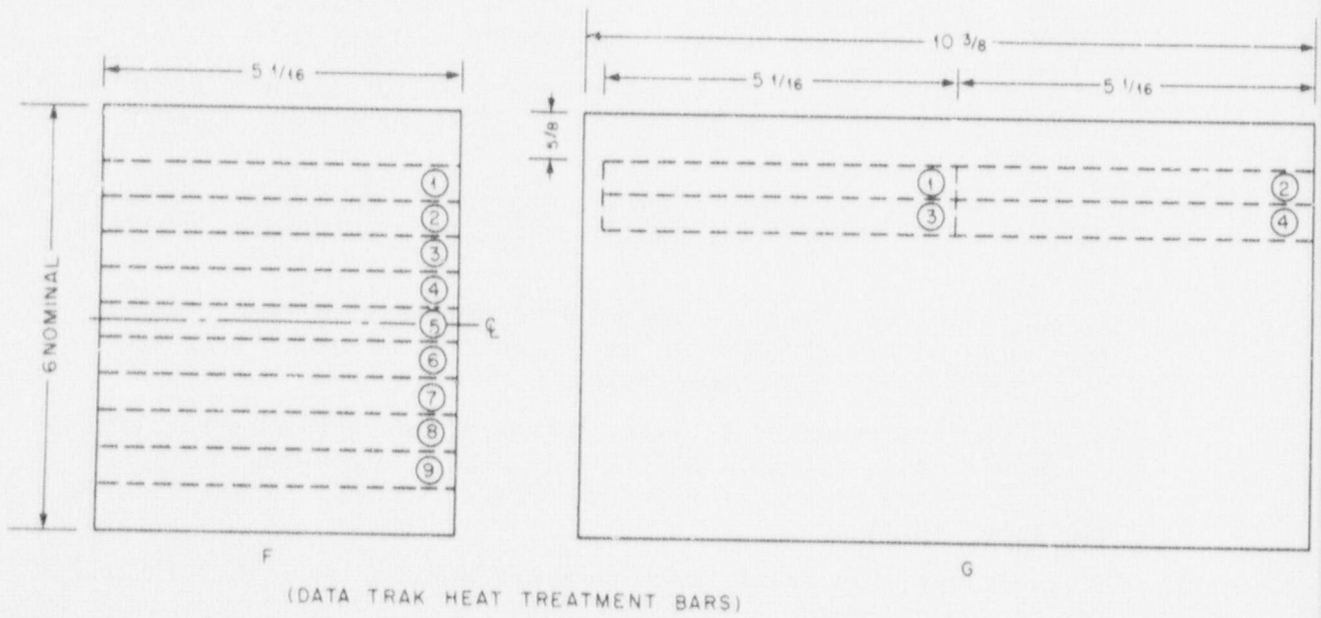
Cutting plan for HSS plate section 04BE (1 in. = 25.4 mm).
